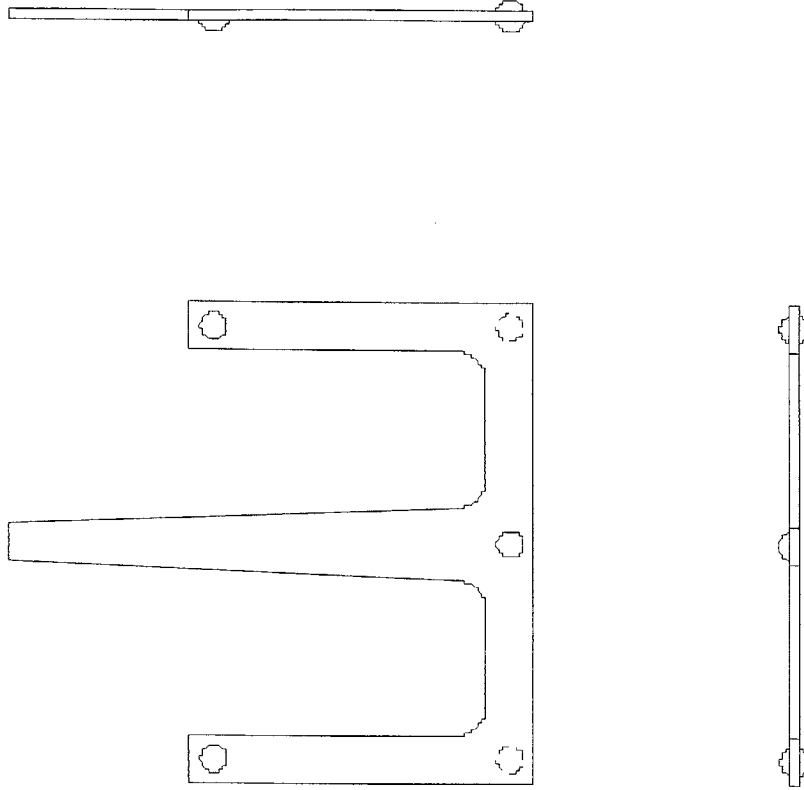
(This shows a top, front, and right side view of one beam type spring used with solenoid design 1. The spherical raises indicate clamping points by either pins or a ferrite piece in the can needed to constrain the spring during operation.)
